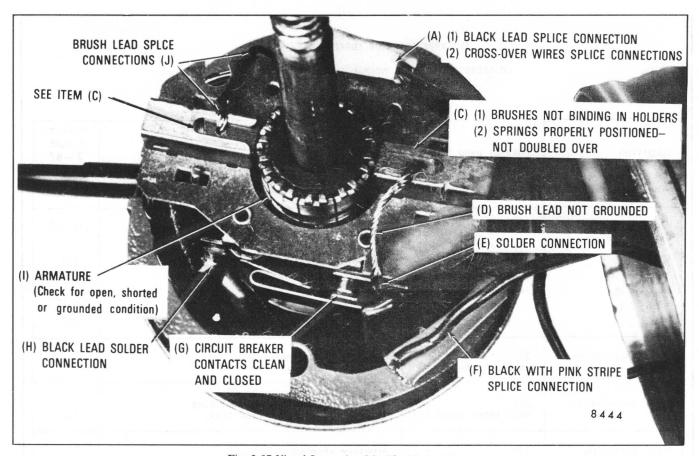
Visual Inspection Modified Pulse Motor
